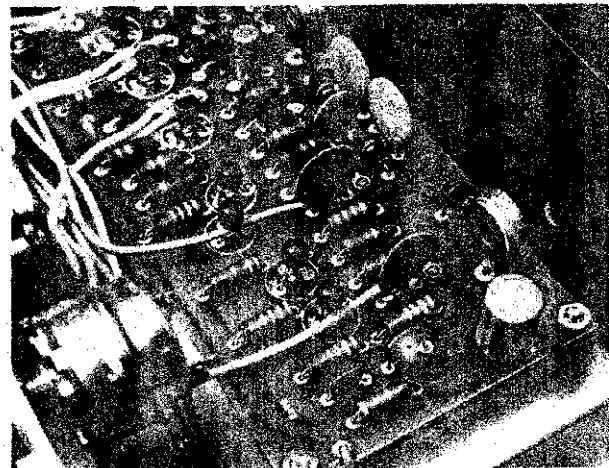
All controls, except pots R28 and R29, are mounted on front panel. Battery holder and printed circuit board are mounted inside the chassis; use rubber feet on under side.
